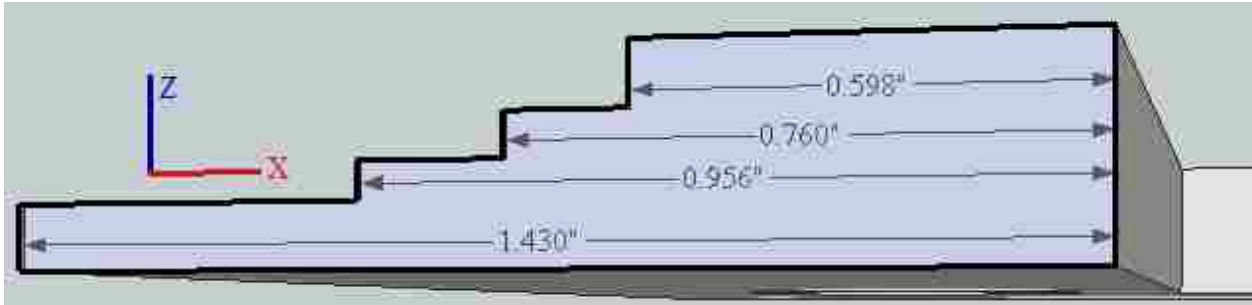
Cross sectional view of the 20x20 cm² lower trimmer lead plate illustrating the in-plane and cross-plane lateral dimensions of the plate. The lower trimmer is square, such that all non-hole dimensions are equal in the in-plane and cross-plane dimensions.
